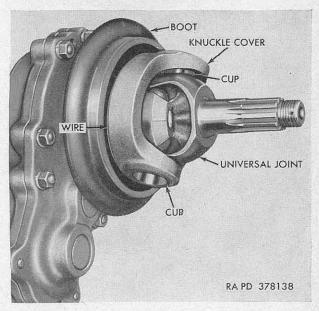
End of axle with steering knuckle removed showing knuckle cover and universal joint.
